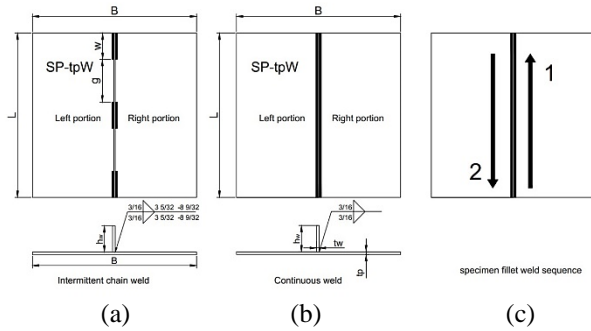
Cross-sectional details of the welded stiffened plate, (a) intermittent chain, (b) continuous and (c) welding sequence
